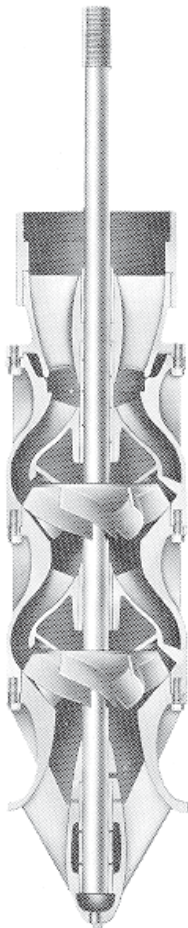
Bowl Assembly General Construction Open Lineshaft Type
